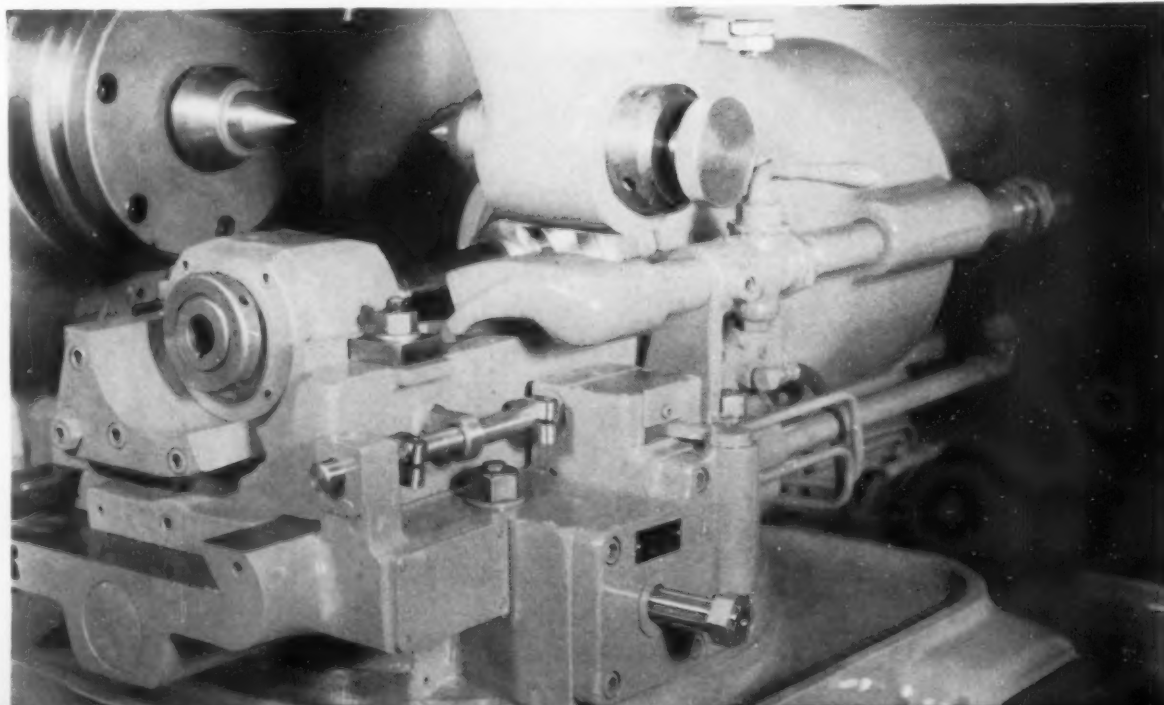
Single-spindle heavy-duty production hobbing machine specially designed for high-speed production.
